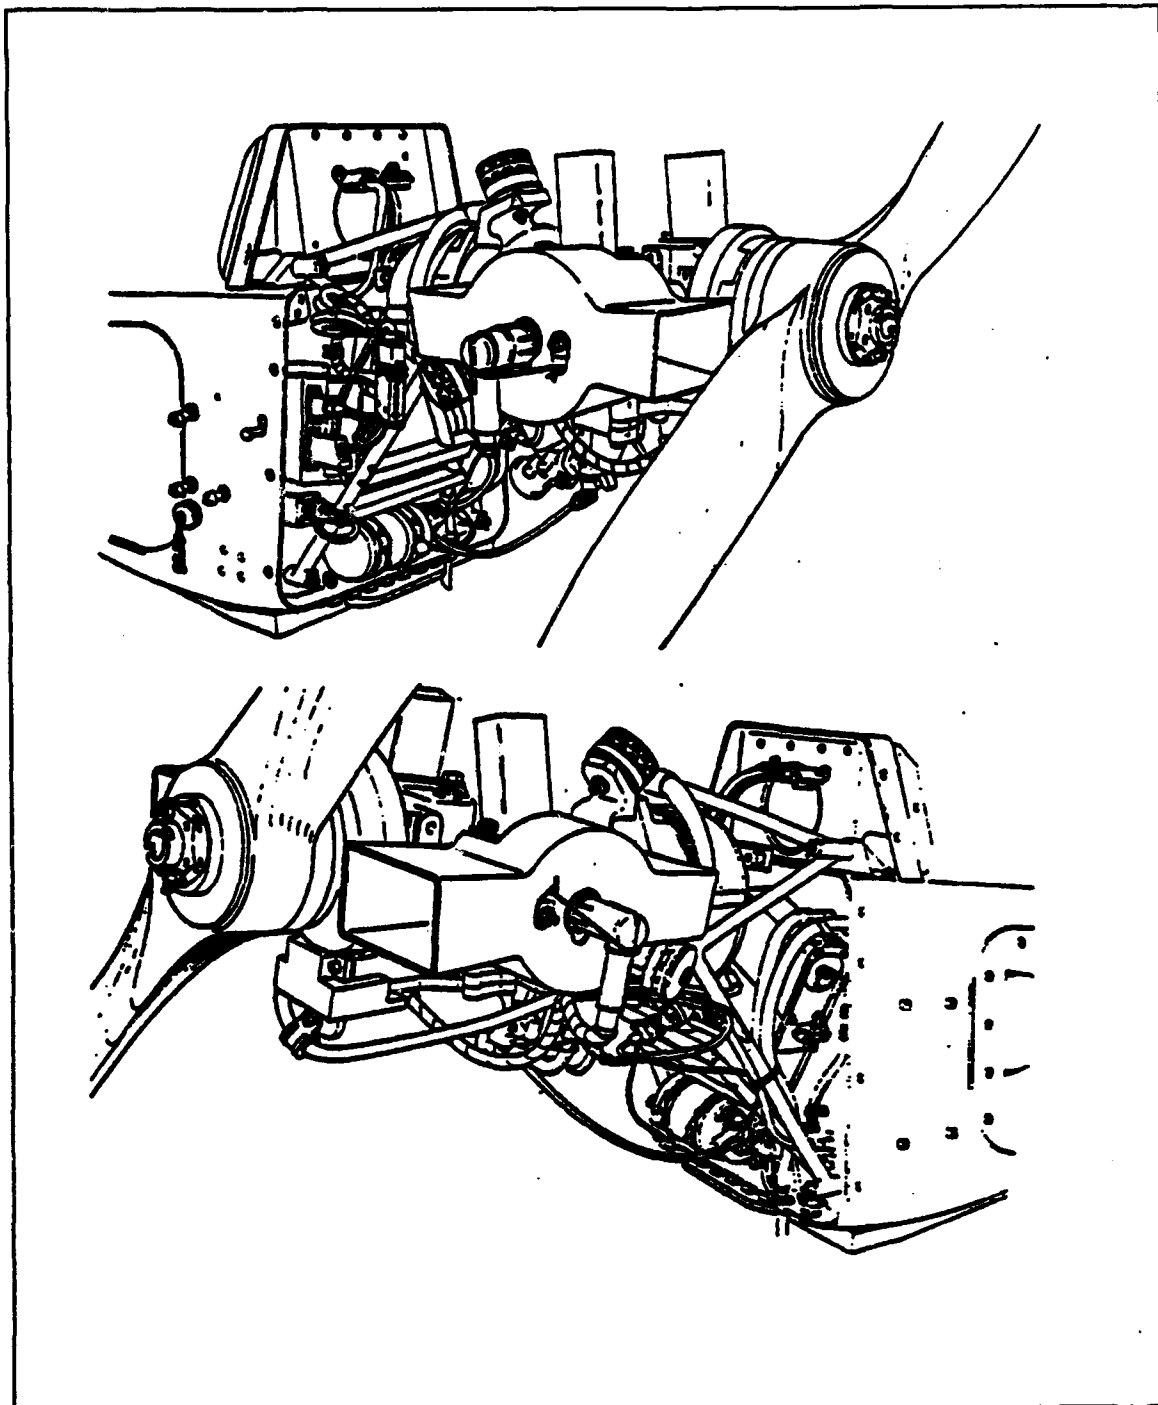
Engine, Left Side View (above), Right Side View (below) (U.S.N. TM Pub No 02E-10, 1990, p. 3-26)
